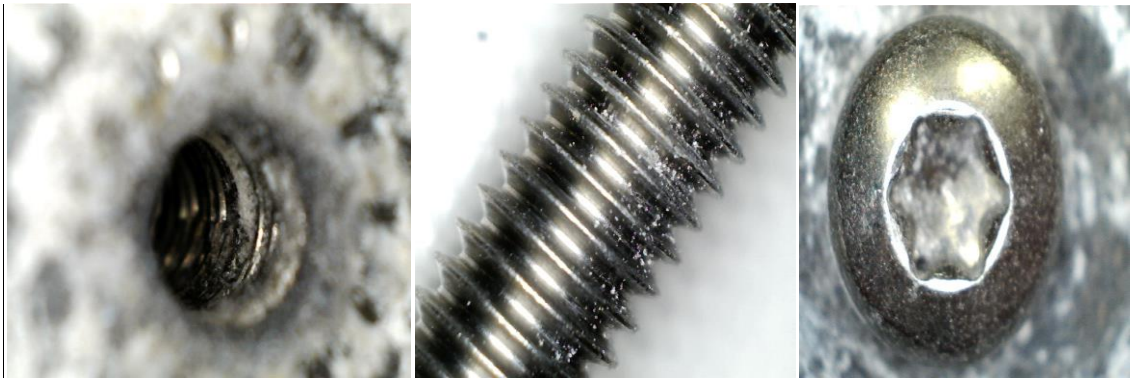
SUS316 waxed, thread and head of the screw after salt fog test
